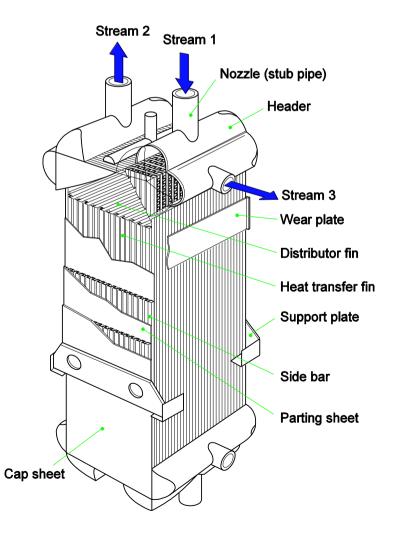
Illustration of a Typical Multi-Stream Brazed Aluminium Plate-Fin Heat Exchanger
